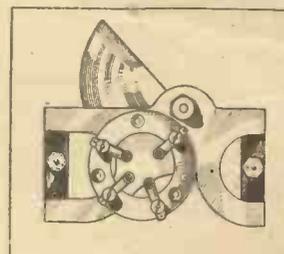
Short wiring in the tuned circuit is obtained by mounting the coil holder on the end of the tuning condenser.
